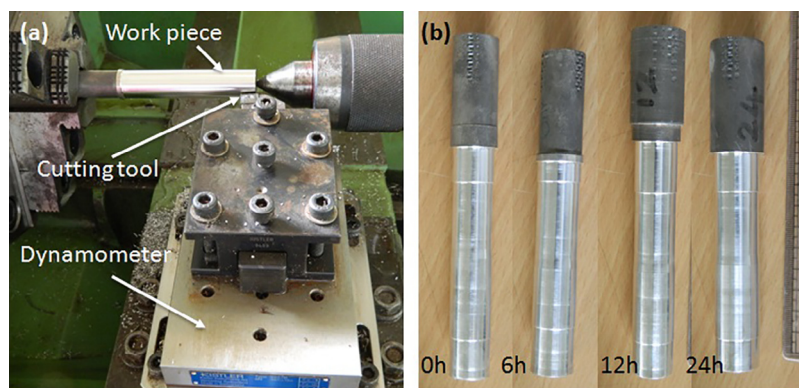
a) Photograph showing the workpiece during turning operation and b) photographs of machined specimens.
